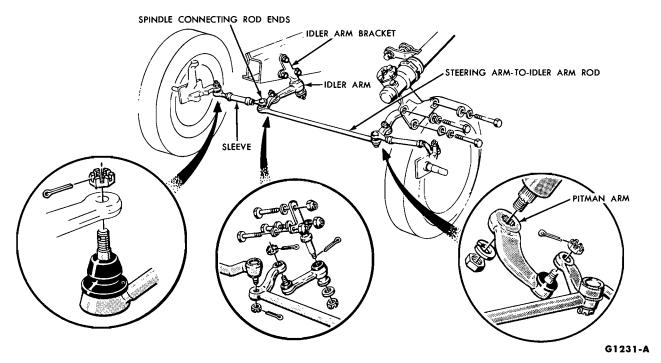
Typical Steering Linkage 8 Cylinder Shown
